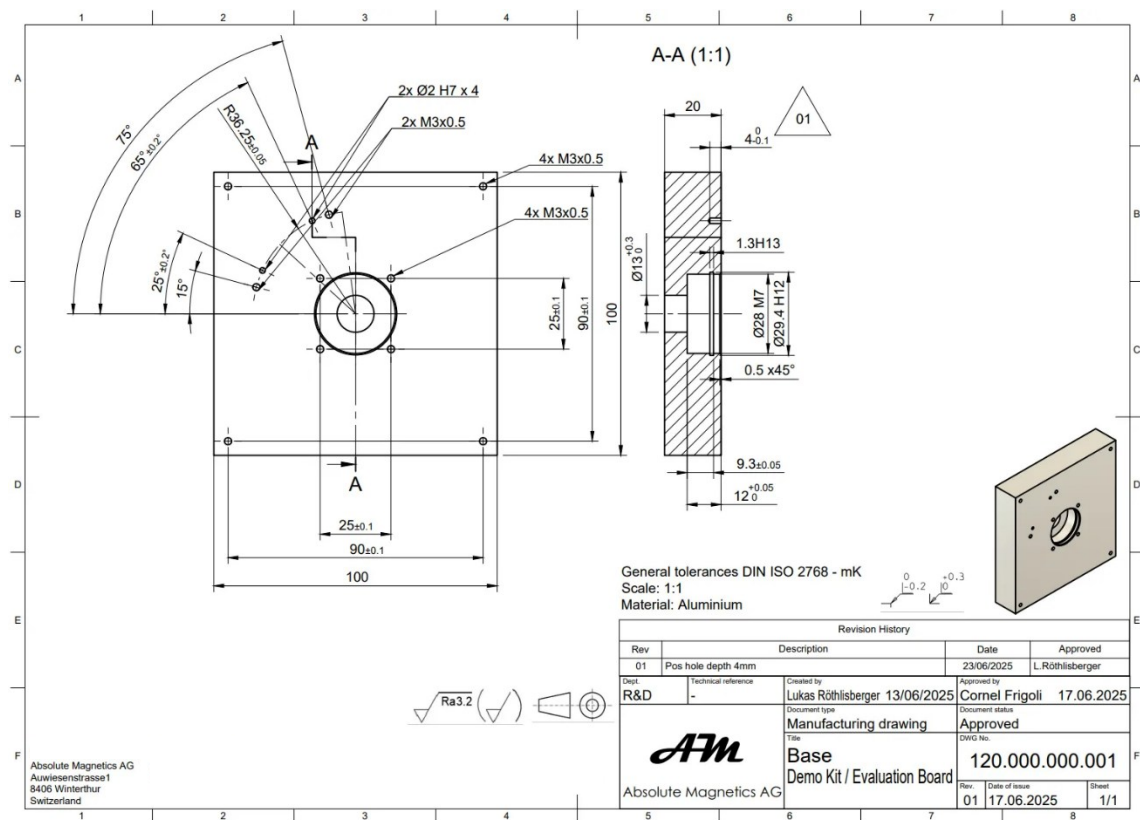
Attachment for the AM electronics board / Manufacturing drawing base plate
